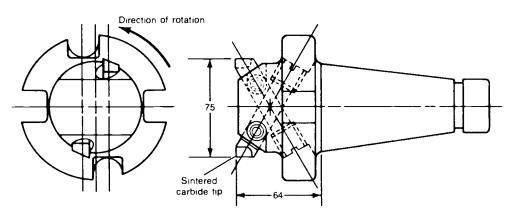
Special two-cut tooth end mill with sintered carbide cutters. Dimensions given in millimeters. Source: Ref 4
